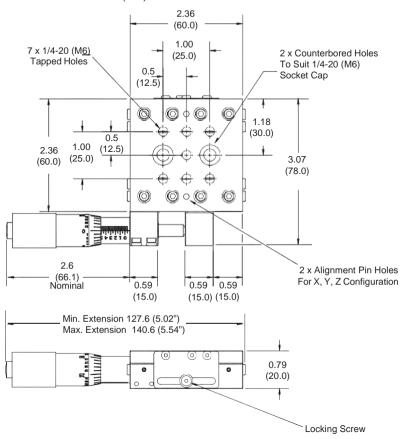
Dimensions – LNR25M (micrometer drives)
